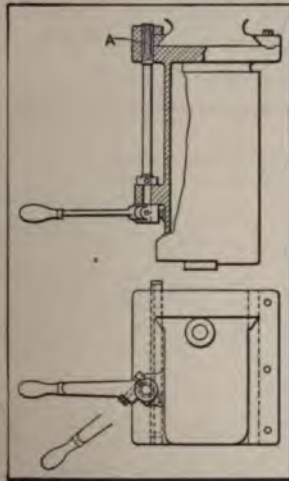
Long Strip for Clamping Knee of Milling Machine
